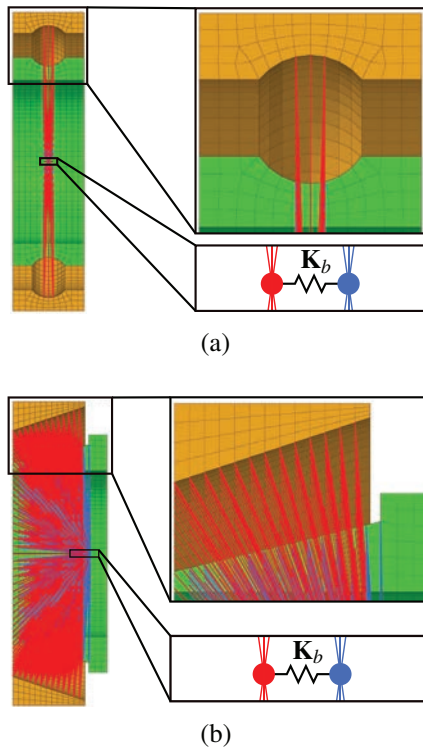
A cross-section view of a bearing in a FEM model with zoomed-in areas; a) ball bearing, and b) TRB
